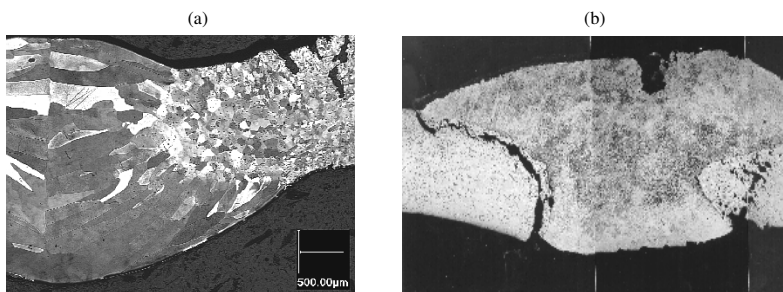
Thermal fatigue cracks: (a) 441 assembly welded with 430LNb (crack in base metal/HAZ, ○); (b) 441 assembly welded with 307Si (crack at interface HAZ/FZ, ×).
